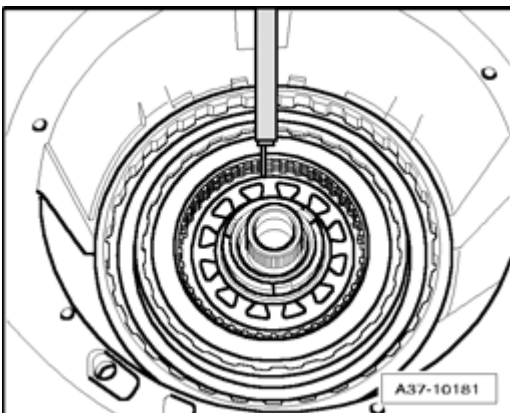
Clutch Plate "C" Positioned Vertically Using Measuring Tongue Of Caliper Gauge
